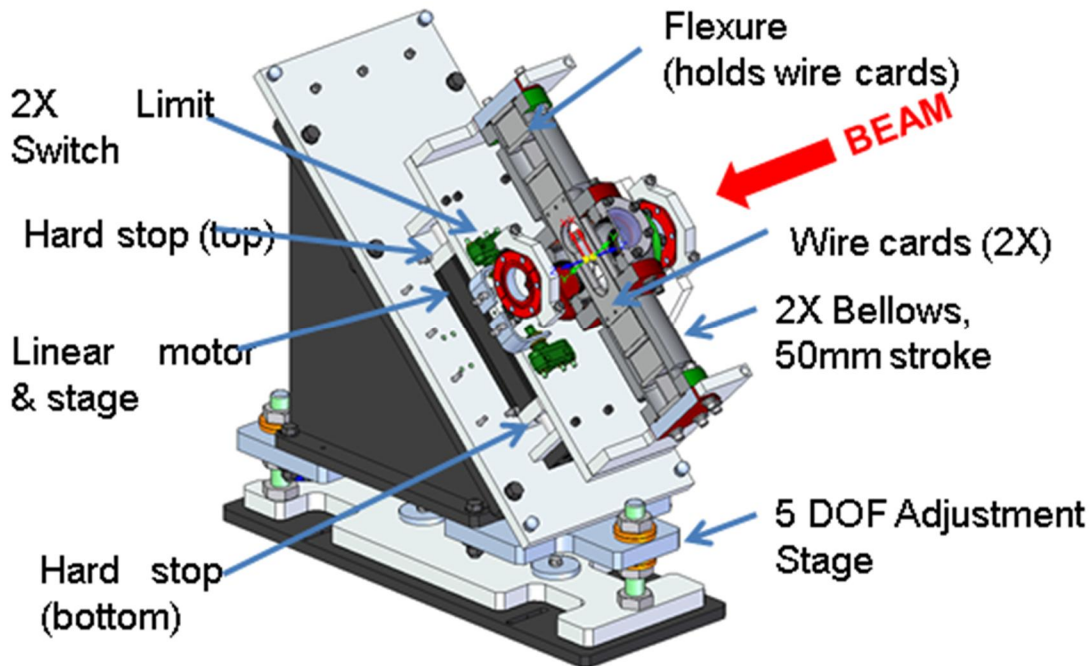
Partially exploded view of Wire Scanner with magnetic shields not shown
